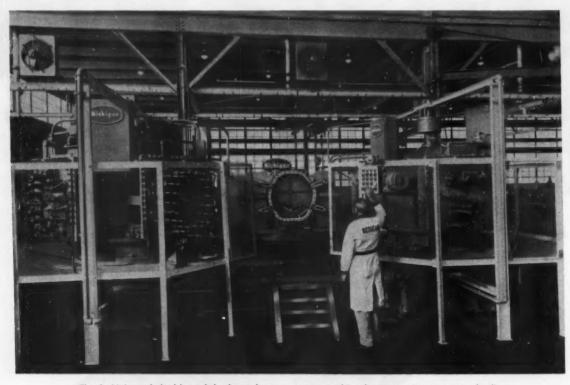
Universal double-end, horizontal, rotary turret machine for processing gas-meter bodies built by Michigan Special Machine Co.
